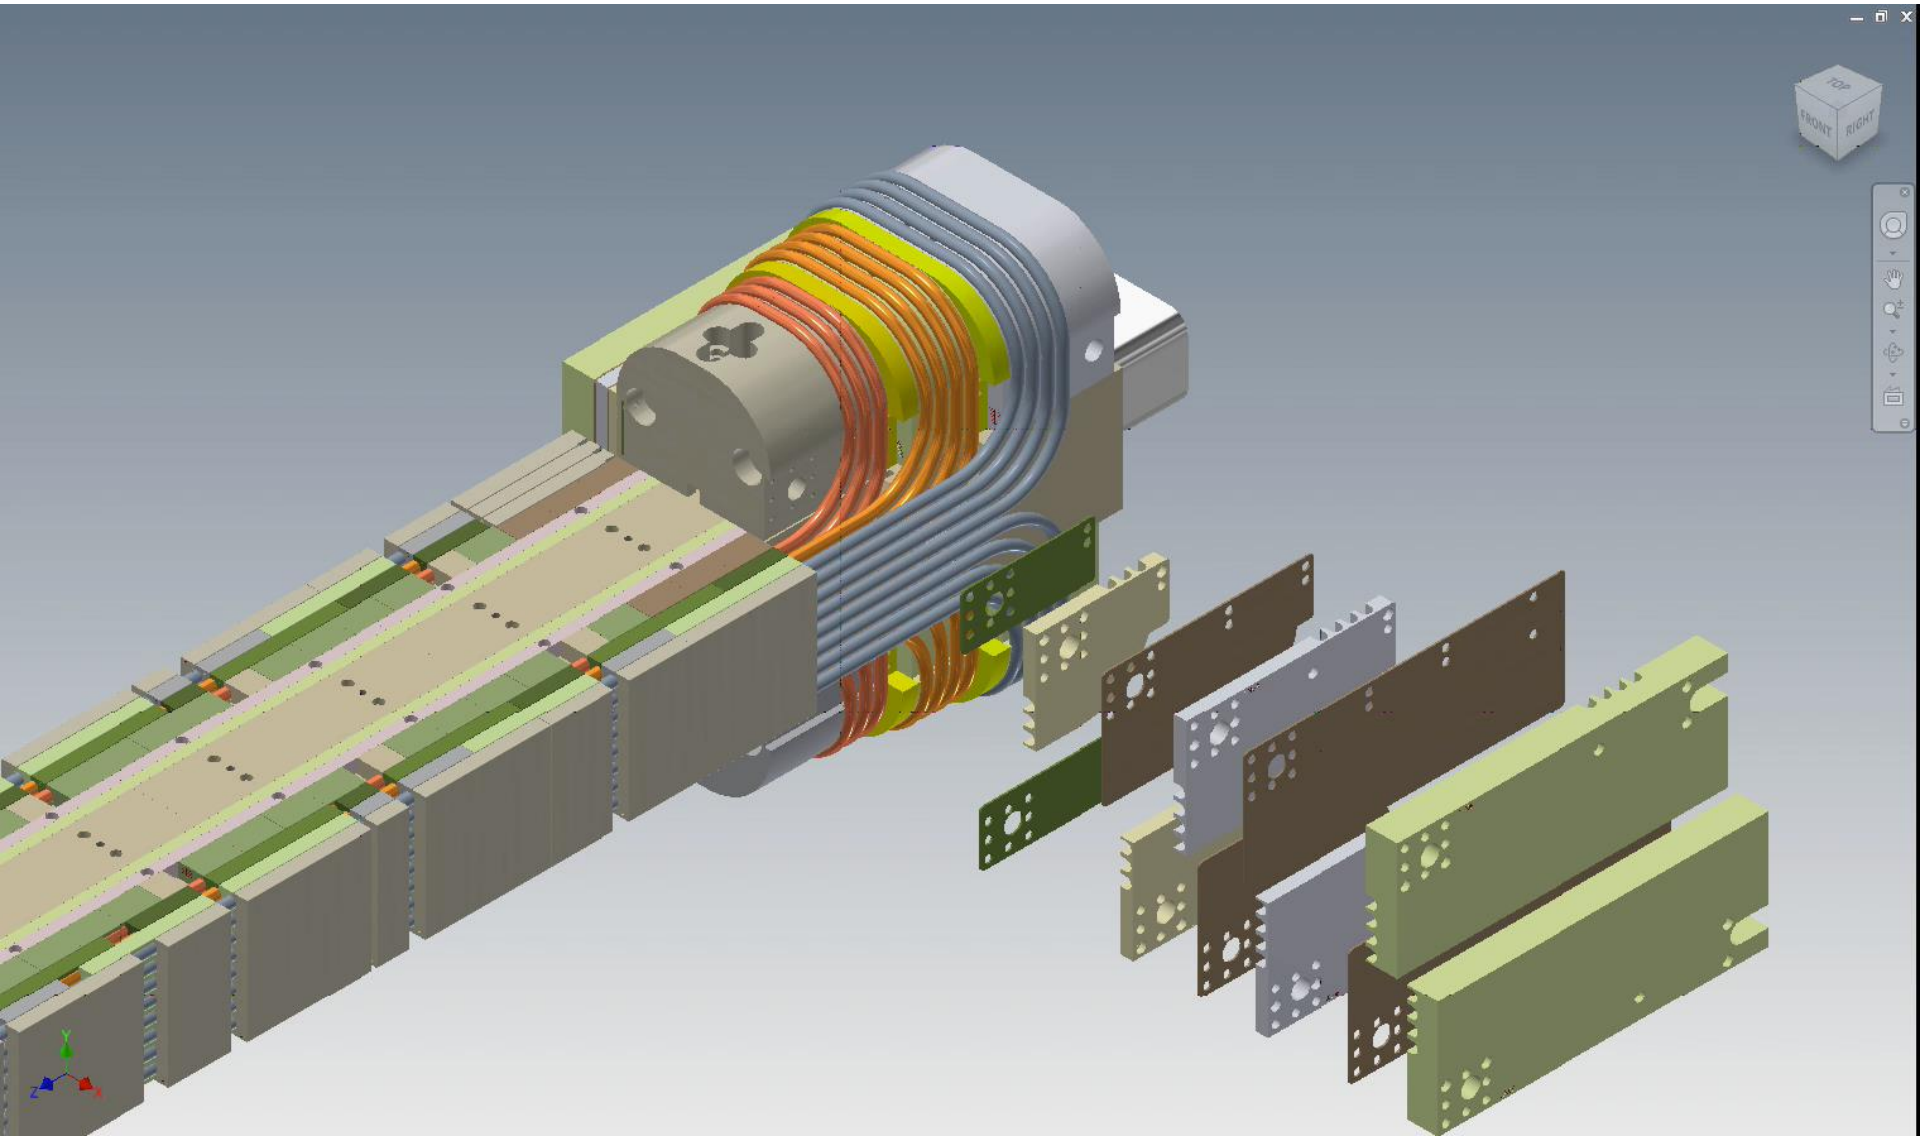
Spacer shoes assembled on all faces of the end assembly.
